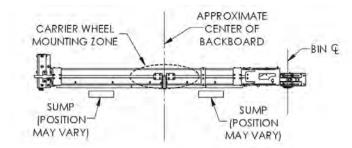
Rear carrier wheel mounting zone in bin < 24' dia.
